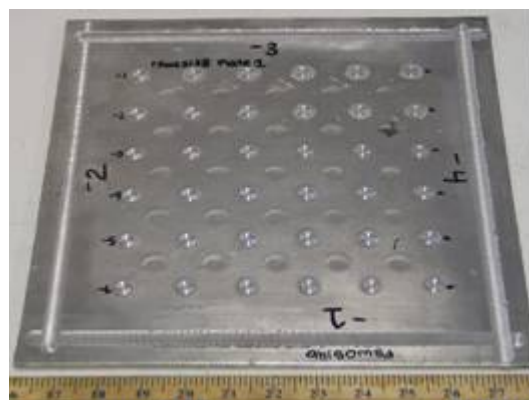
Friction Stir Spot Welded three sheet multisheet pack prior to SPF testing. This configuration is designed to produce the corrugated structure. Alternating spot welds are made from each side of the multisheet pack using the “Refill” (GKSS-Riftec) FSSW method at the SDSMT.
